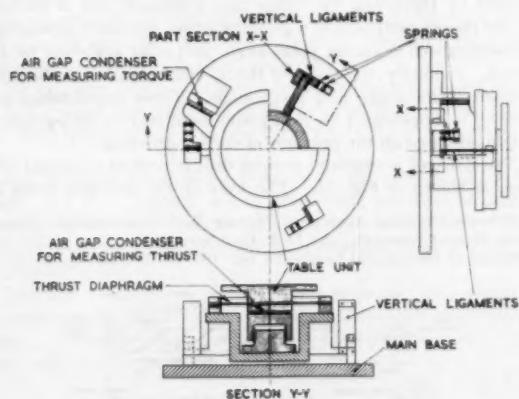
SPECIAL MACHINES FOR INVESTIGATIONS INTO DRILLING
